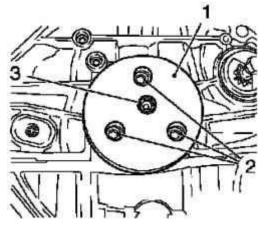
Installation omentum: 1 - a special tool KM 6623; 2 - fixing screws, 2 - screw fixing
